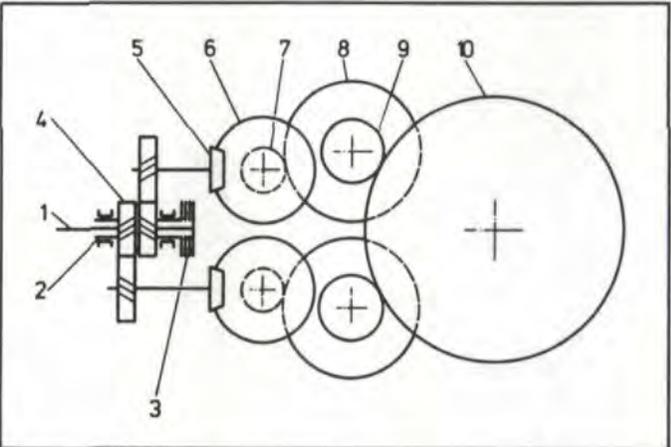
Gearing scheme of rolling mill gear drive shown in Fig. 7. 1 = input shaft; 2 = hollow shaft; 3 = steel lamella disk coupling; 4 = herringbone gear; 5, 6 = bevel gear pair; 7, 8, 9 = spur gears; 10 = gear on output shaft
